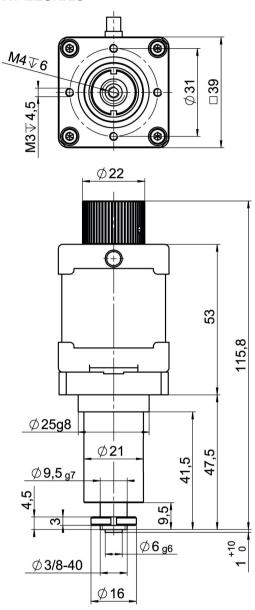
M-228.11S, dimensions in mm. Note that the decimal places are separated by a comma in the drawings.
